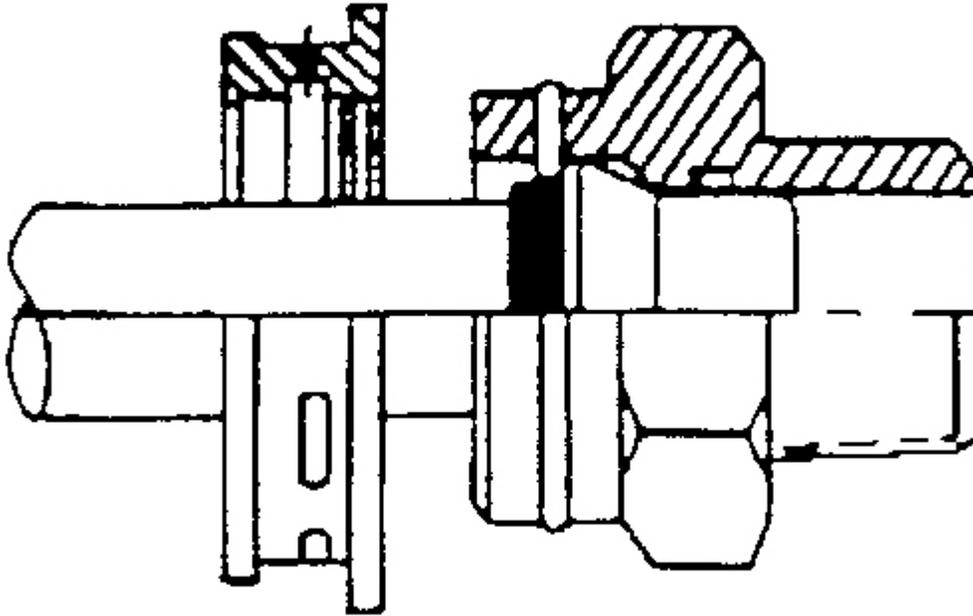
Installing Cooler Line Into Quick Connect Fitting
